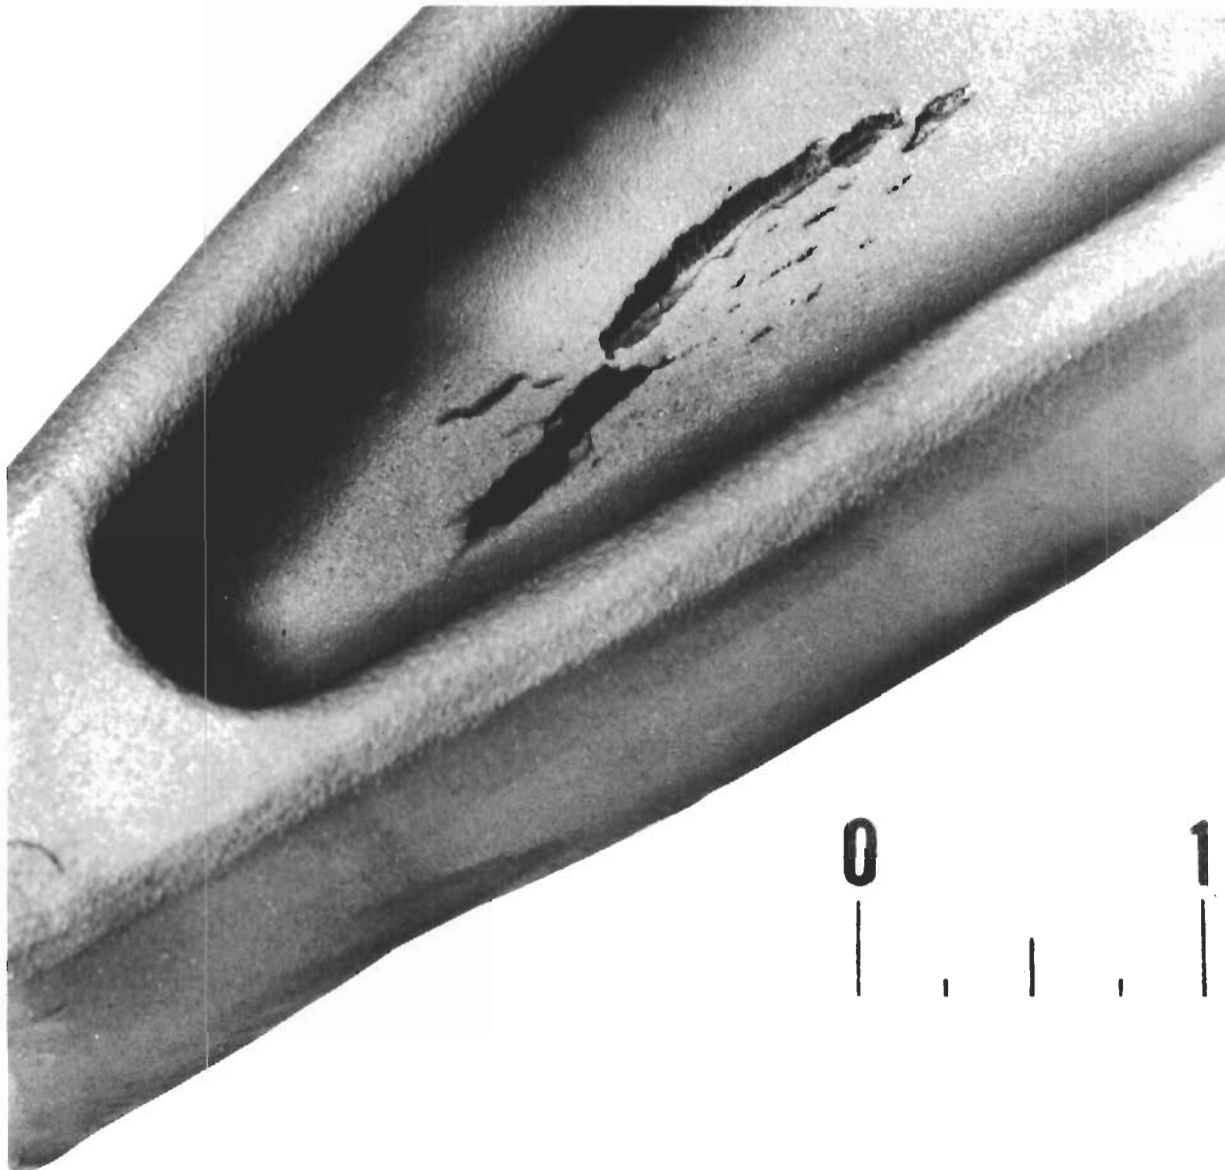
Severe Cracking in Web Surface of the Fifth Inconel 718 Fin Rib Forging Produced (of Twelve Forgings Total, the Third of the Ten Delivered to TRW) During Final Forging Efforts with the 4000 Ton Mechanical Press.
